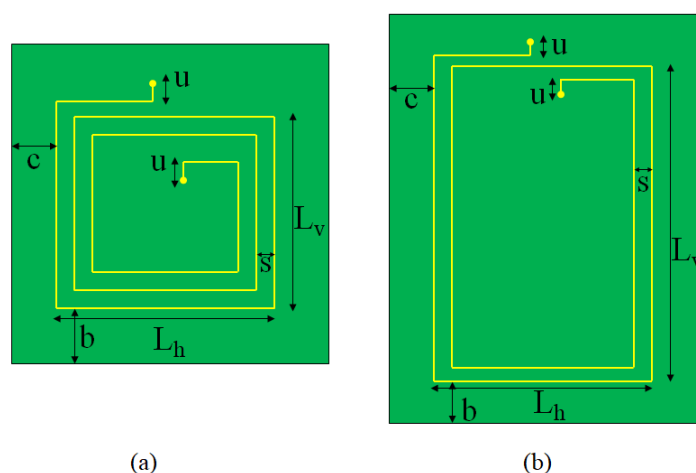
Key dimensions of double-sided PCB elements: (a) Type A square three-turn coil (b) Type B rectangular two-turn coil.
